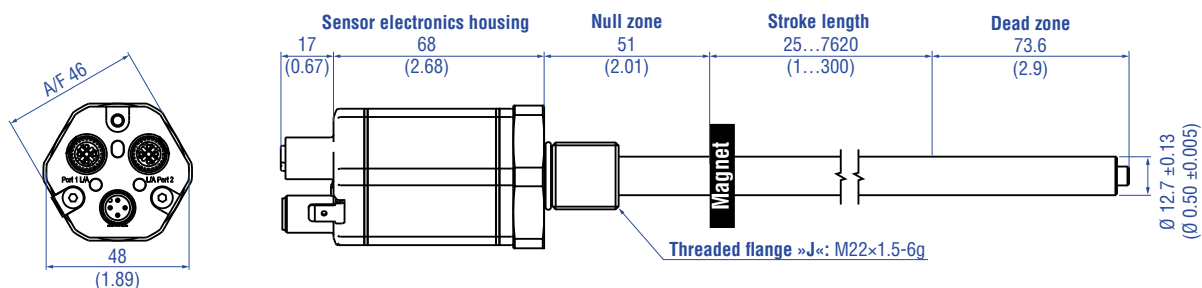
Model RH5 Rod-style sensor dimension reference (shown with D58 integral connector options)
